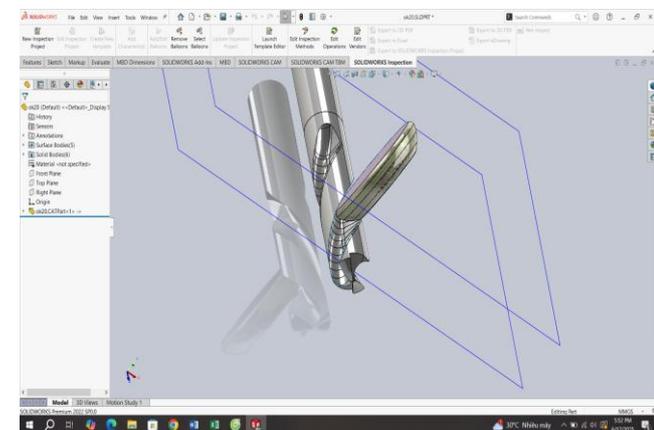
Grinding disk 3D model was loaded to Solidworks (D = 25)
